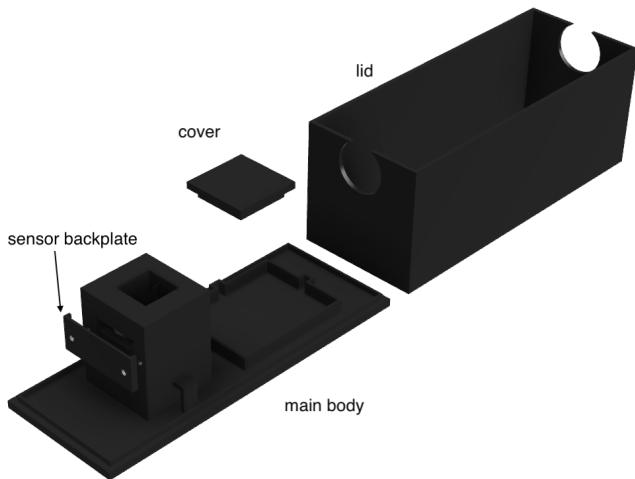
3D printed Mechanical enclosure for the device, showing 4 separate components.
